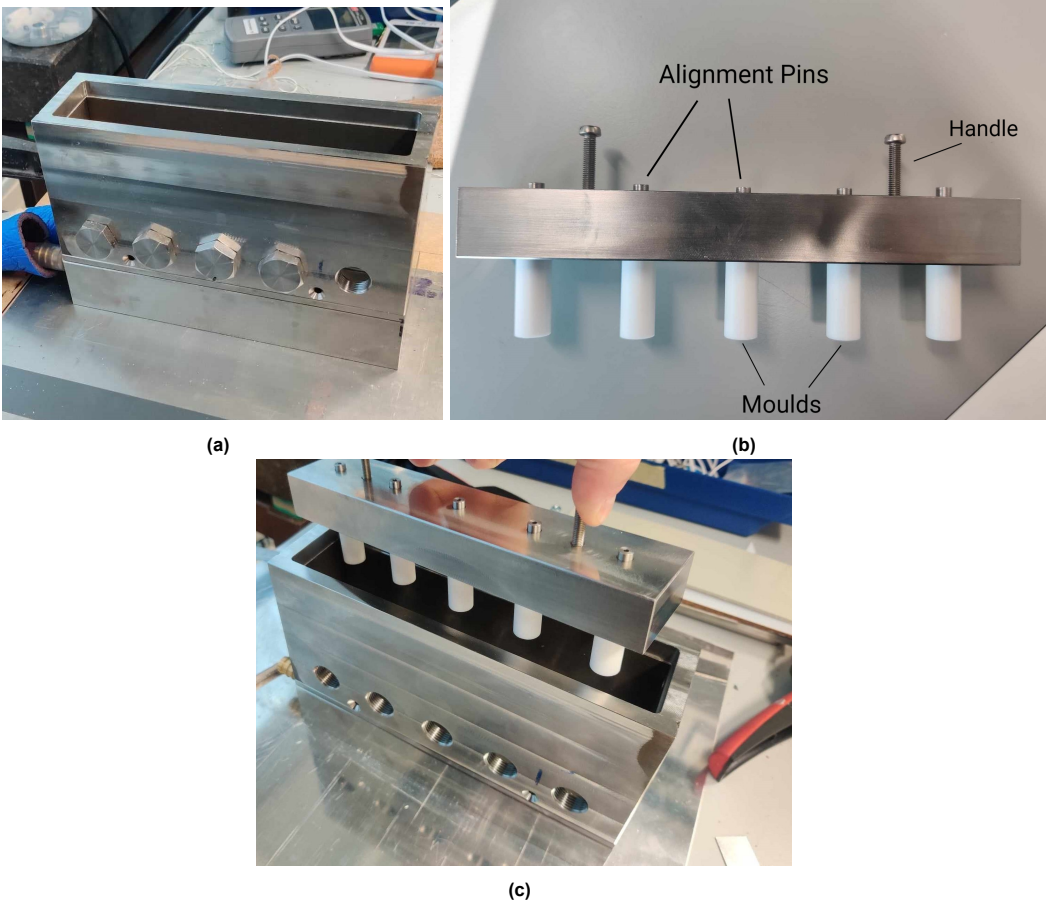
(a) Housing chamber with cooling chamber below. (b) Alignment block and (c) Alignment block placement during operation.
